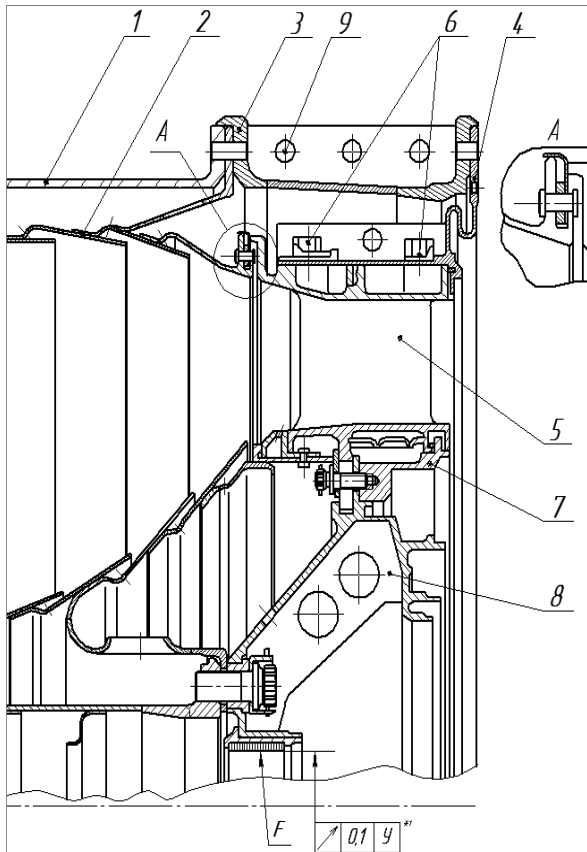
New design output of the combustion chamber and of the turbofan turbine nozzle vanes:
